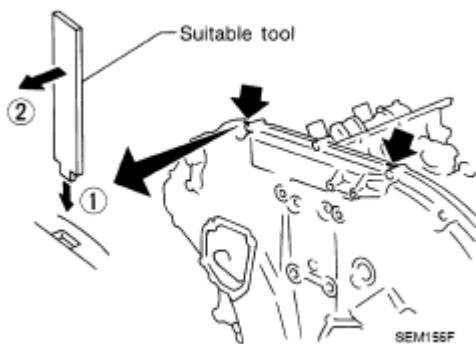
Removing Front Timing Chain Case Using Suitable Tool
